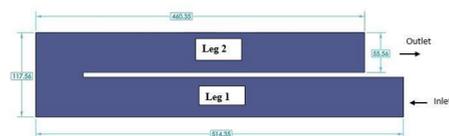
Two pass cooling channel (Front view, all dimensions in mm)
